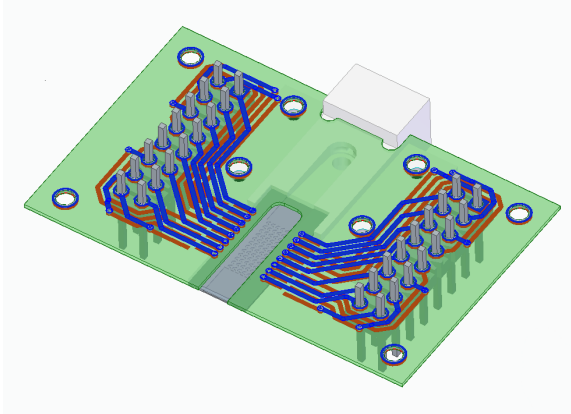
CAD assembly of the VLM and 2nd iteration fluidic interface with a single PCB design, used as holder for the whole assembly. The PCB is shown as semi-transparent, even though in reality it is opaque.
